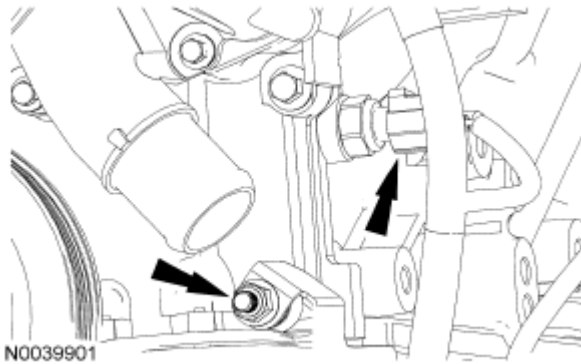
Locating Oil Pressure Switch Electrical Connector And Nut
